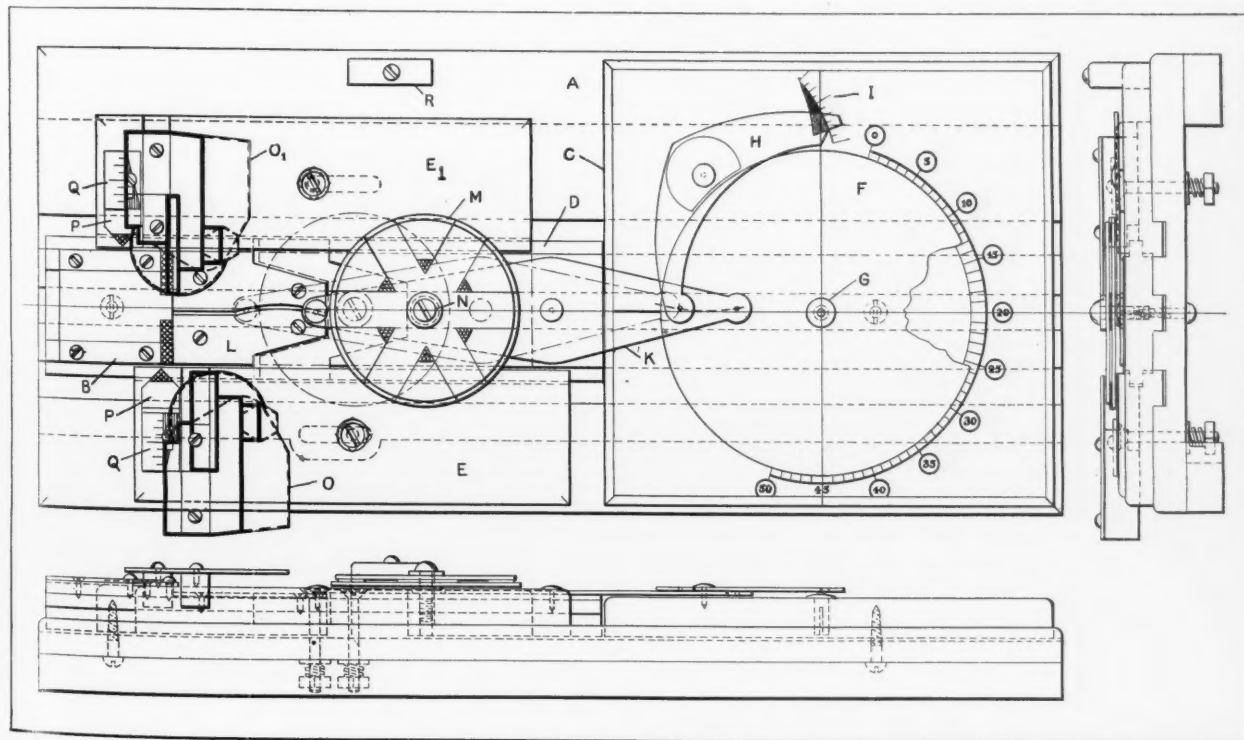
Diagram-model for checking Clearance of Automatic Screw Machine Tools and for developing Lead Cam Profile
